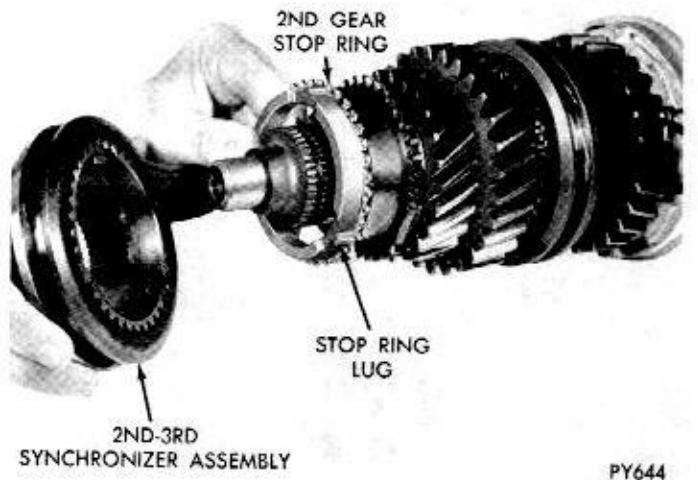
2nd-3rd Synchronizer Assembly and Stop Ring—Removal or Installation
